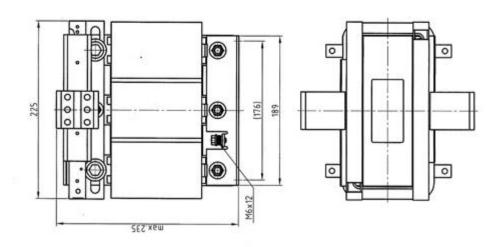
Dimension drawing of the line reactor for the Smart Line Module 36 kW
